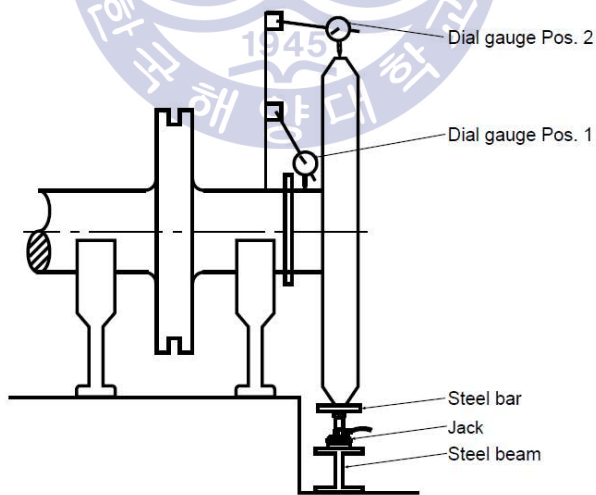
Dial gage position for jack-up of the aftmost main bearing
